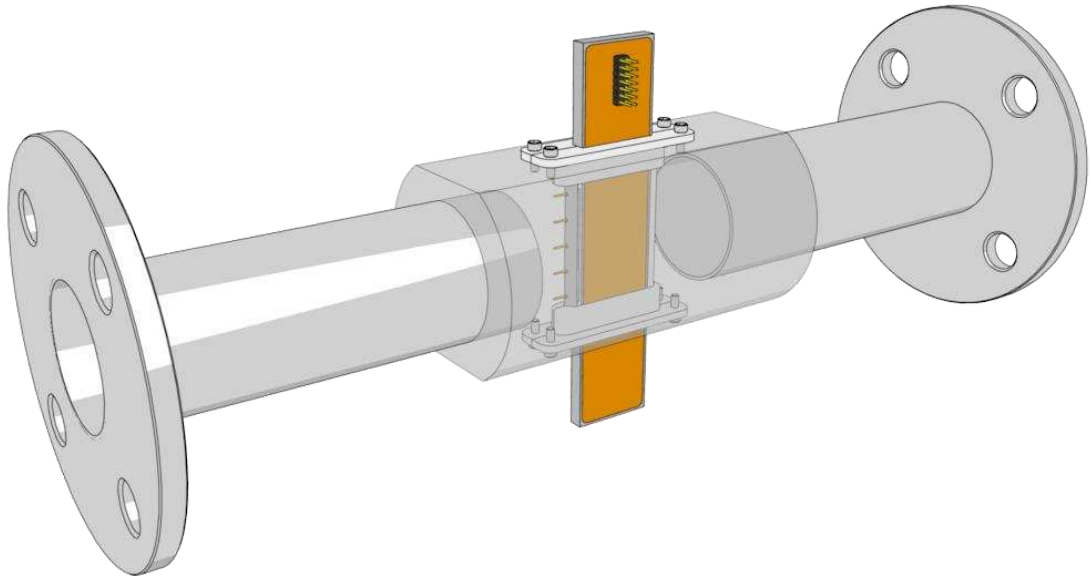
Illustration of the piezoelectric impact sensor array mounted inside the custom pipe spool
